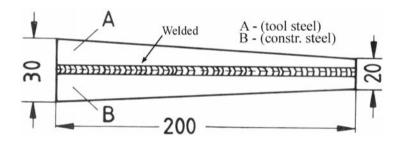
Geometry of the welded sample for the laboratory hot rolling experiment
